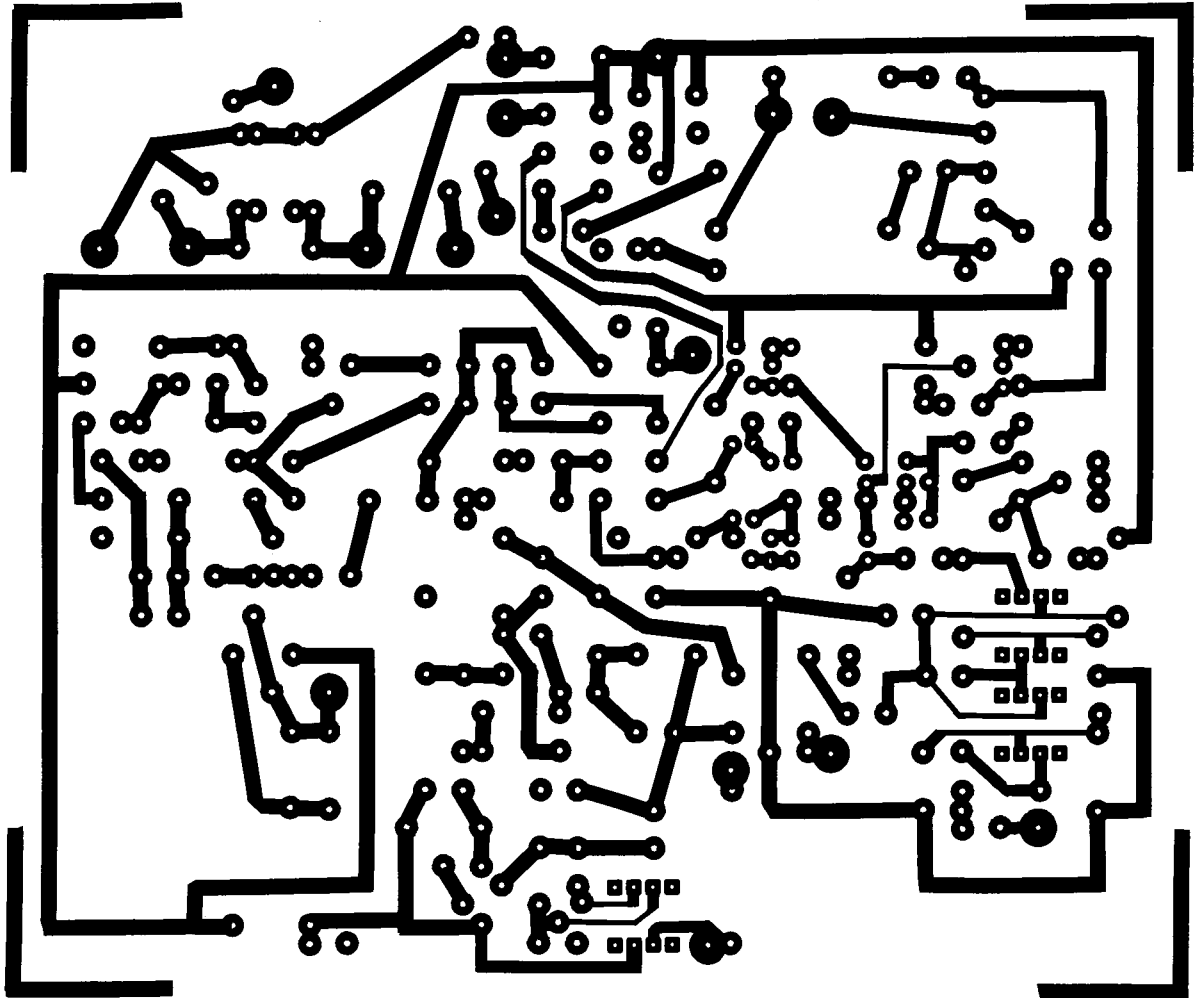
1.8MHz QRP transceiver PCB layout
